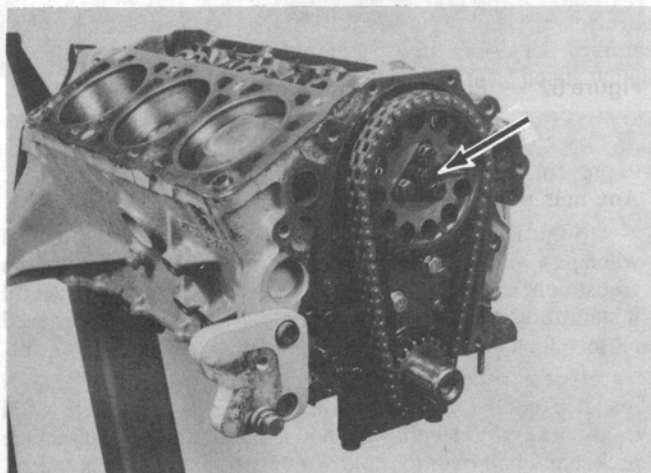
Production timing set with aftermarket camshaft thrust bearing.
